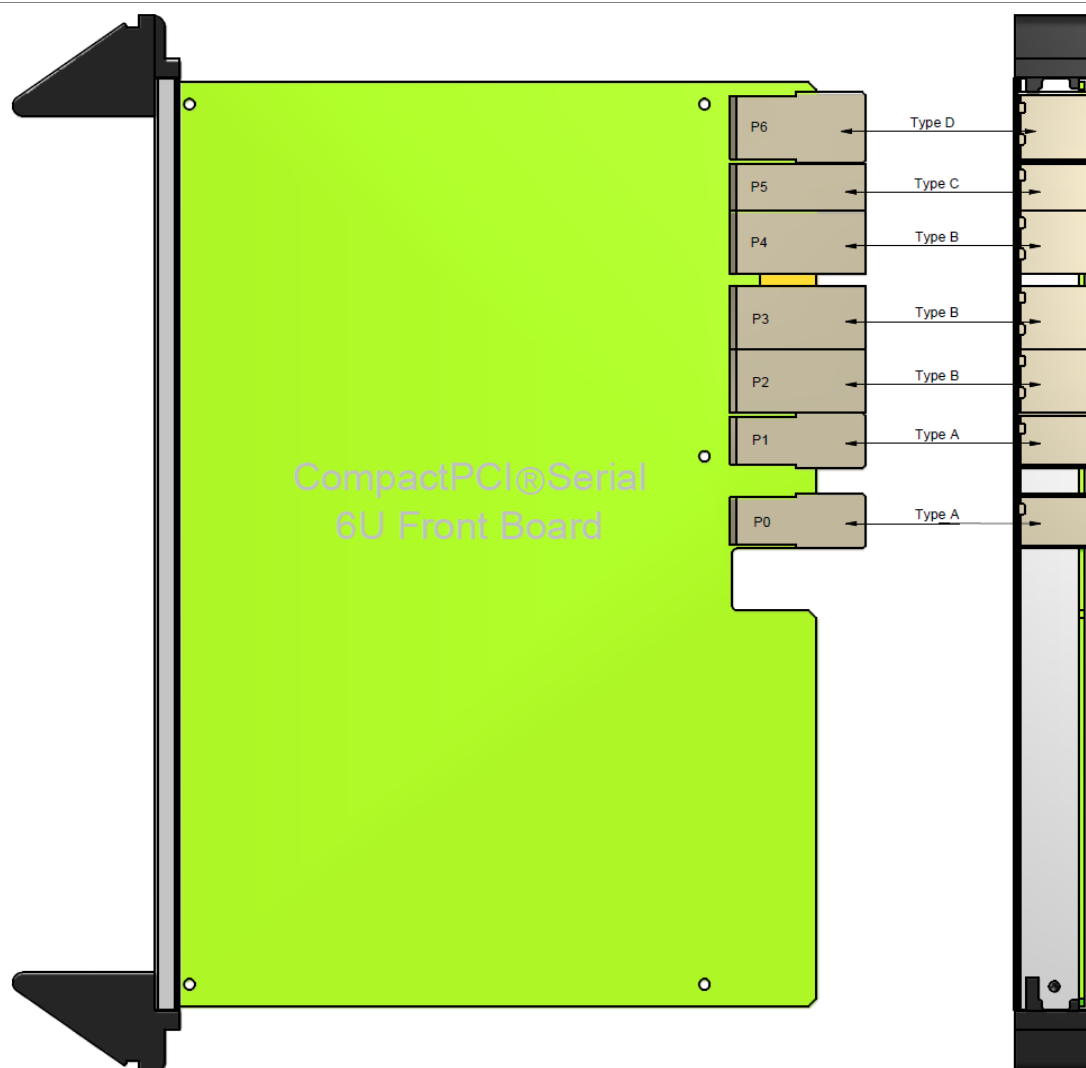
6U Connector Plug Types A, B, C and D on Front Boards
